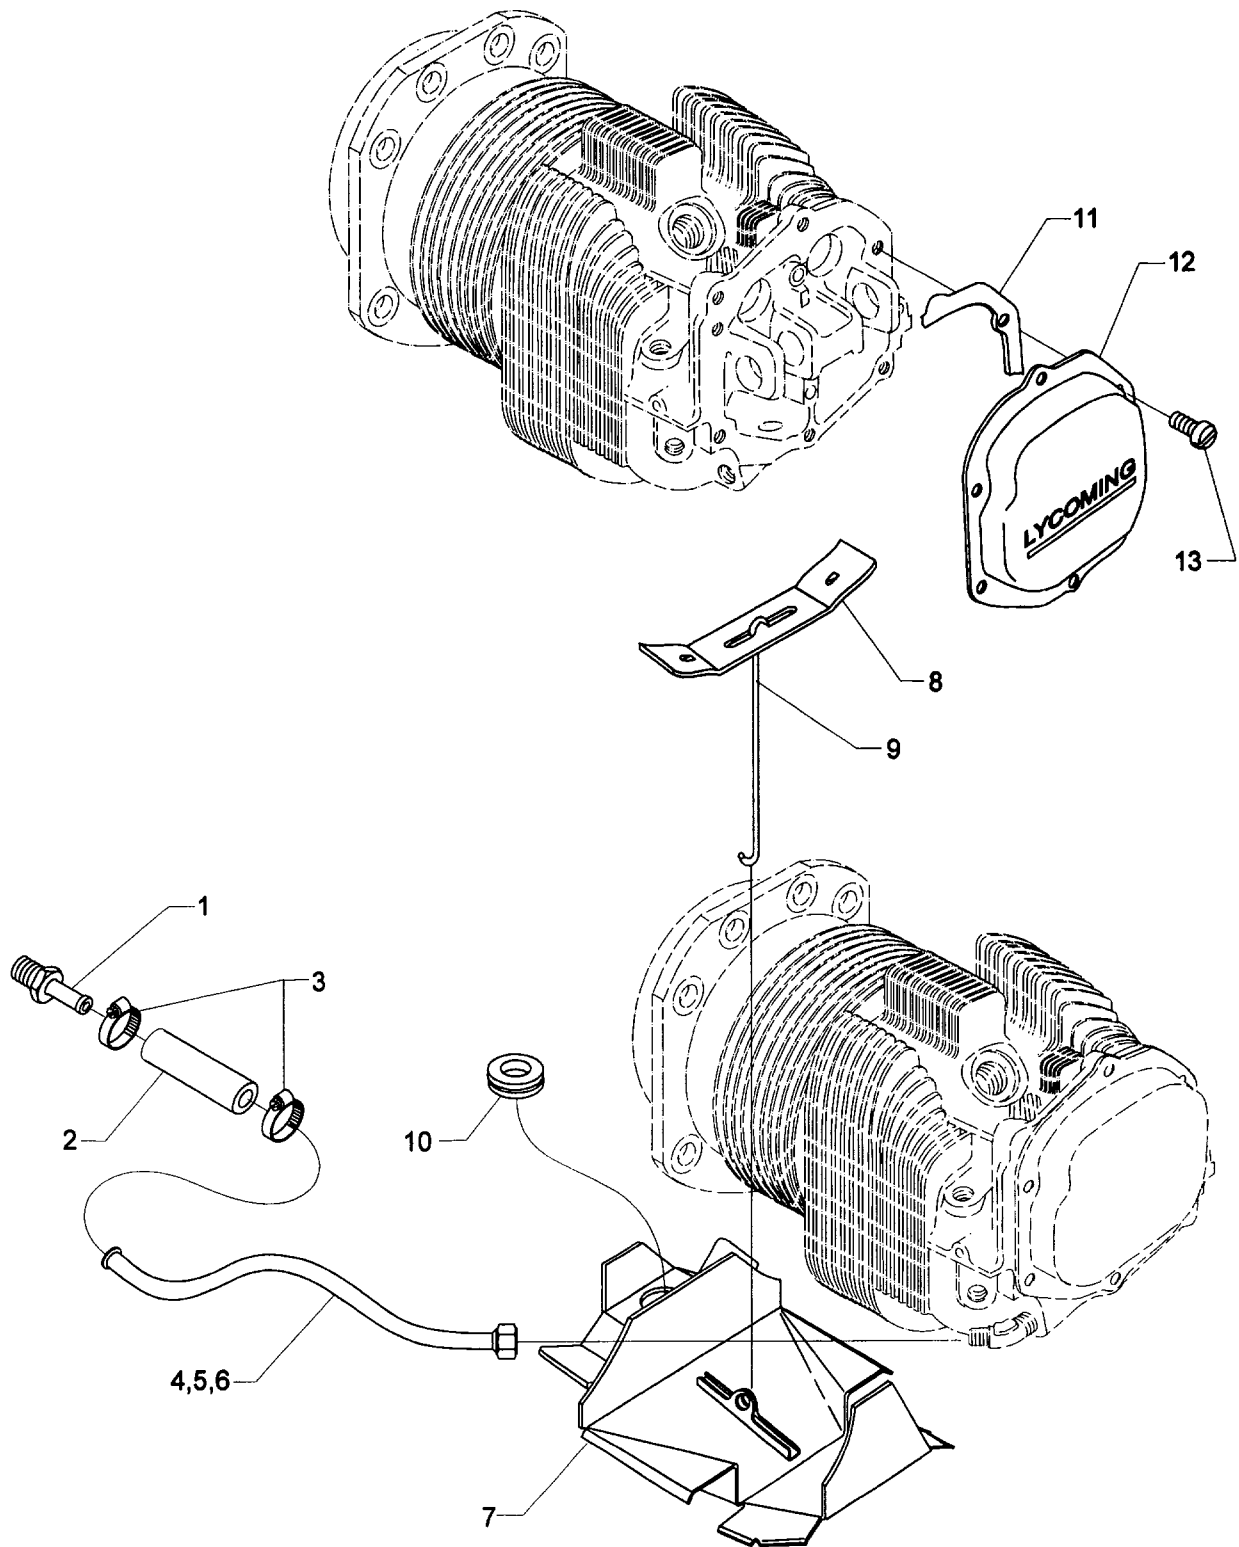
CYLINDER HEAD DRAIN TUBES, INTERCYLINDER COOLING BAFFLES AND ROCKER BOX COVERS
